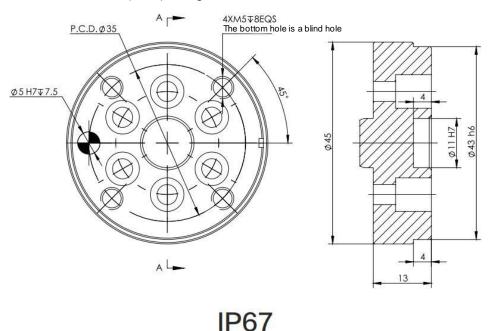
Dimensions of P7A-700(IP67)/P7A-900 Flange
